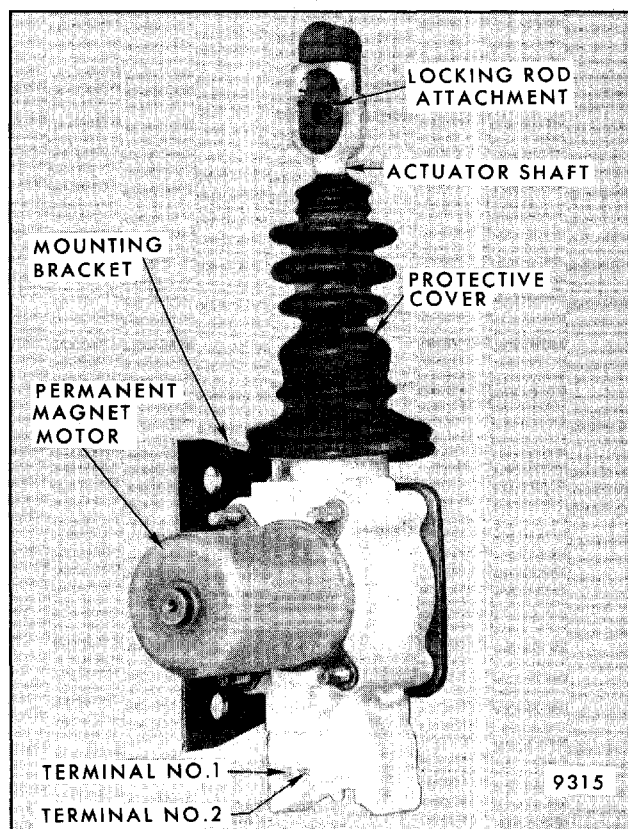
Permanent Magnet Motor Lock Actuator Assembly
